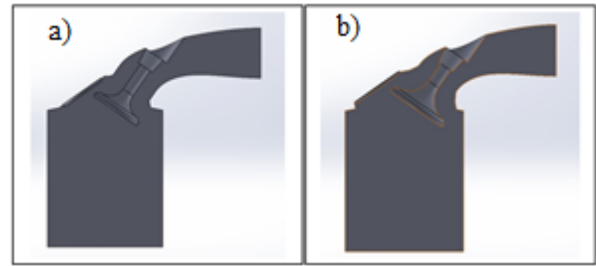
(a) 23 mm Intake Valve and (b) 27 mm Intake Valve.
